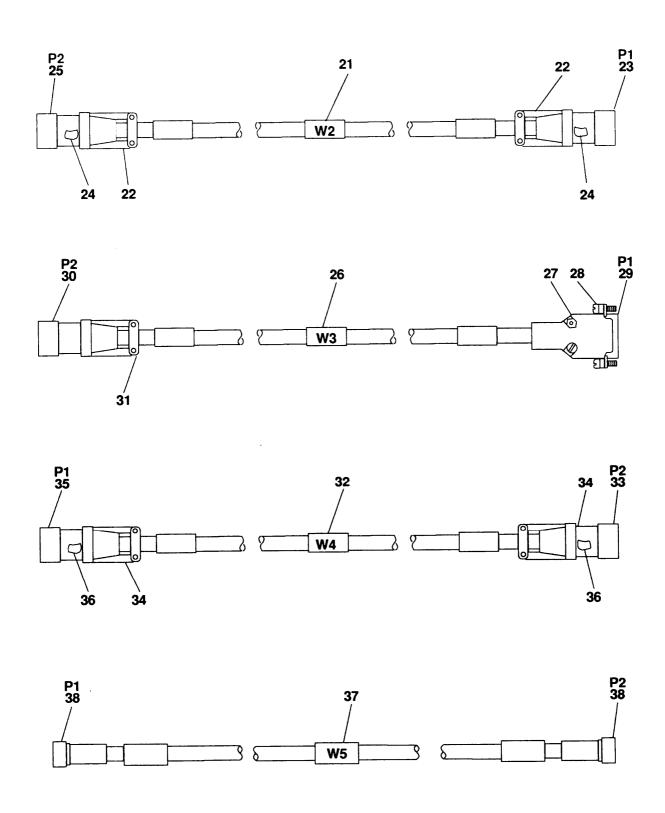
UH60A/L System Installation Cable Group (Sheet 2 of 3)
